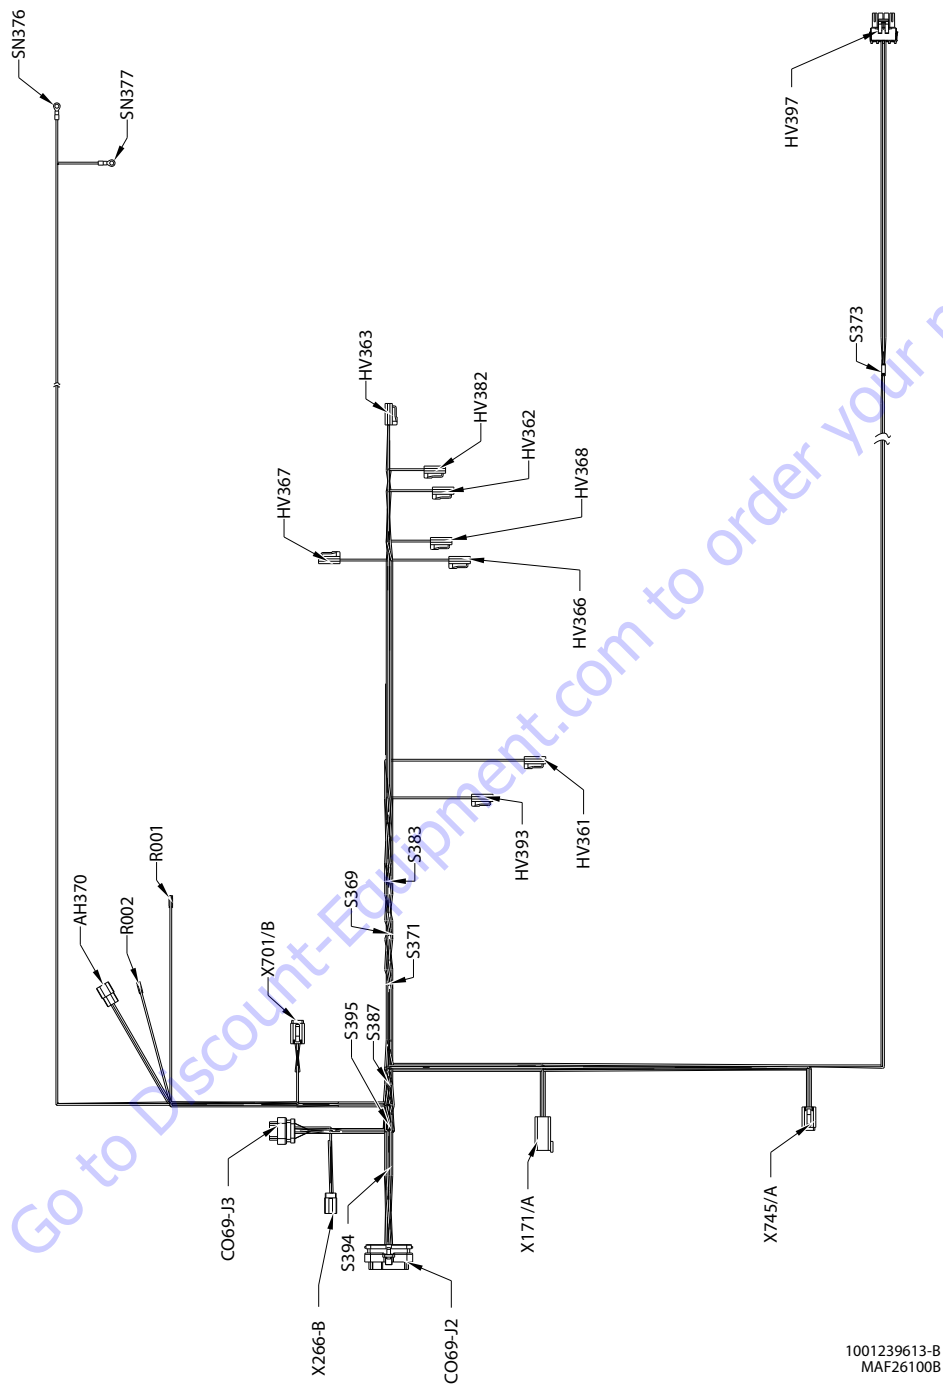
Crawler Main Valve Harness - Sheet 1 of 4
